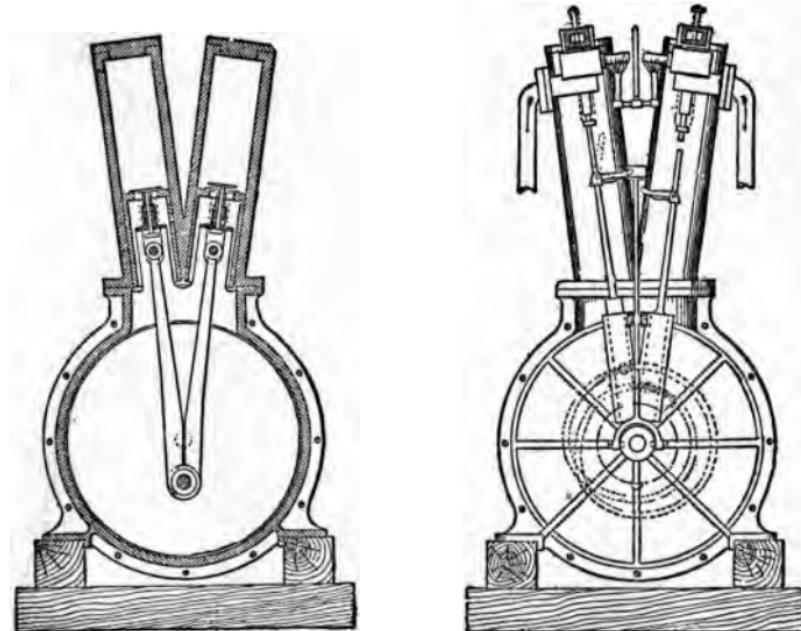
Side elevation and sectional diagram of the Daimler, two-cylinder V-shaped engine; showing annular cam-groove, for operating the exhaust valves and piston-head air valves; also position of the pistons, pitmans, and crank at lower dead centre.
